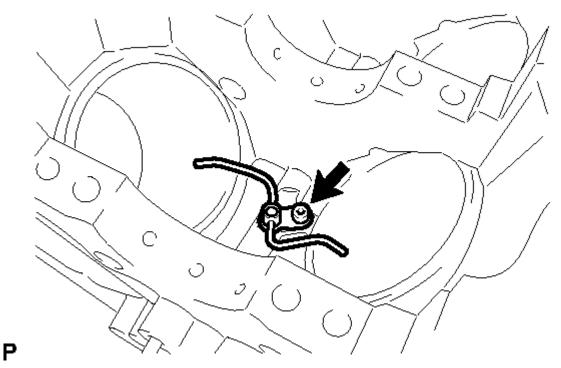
Locating No. 1 Oil Nozzle Sub-Assembly
